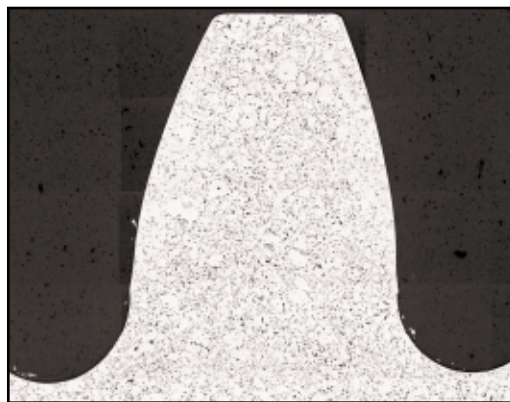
Photomicrograph of rolled densified helical gear tooth taken through crowned section.
